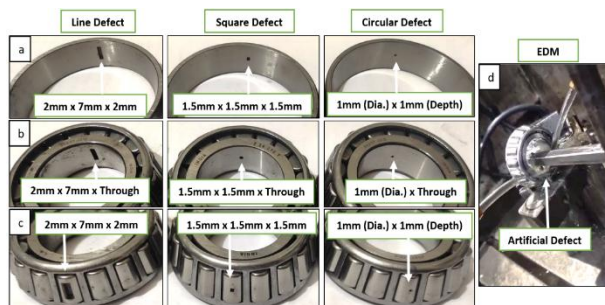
Test setup: (a) Dimension of defect on inner race b) Dimension of defect on outer race c) Defects creation using EDM.
